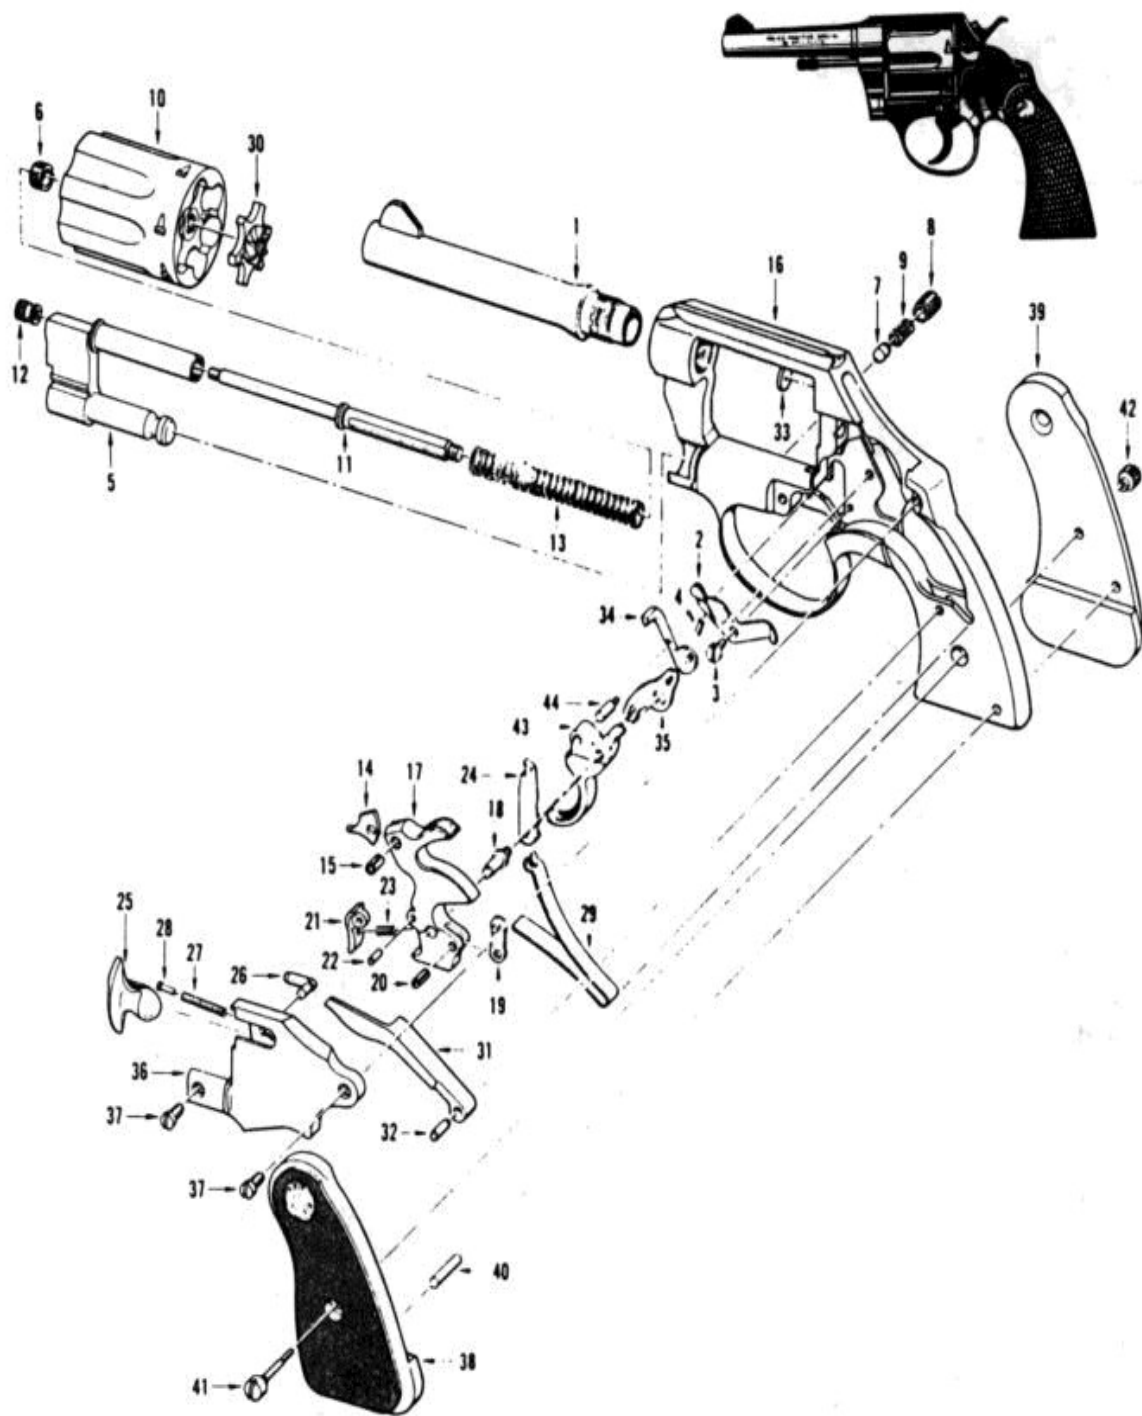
Exploded view of Colt's Police Positive Revolver.
